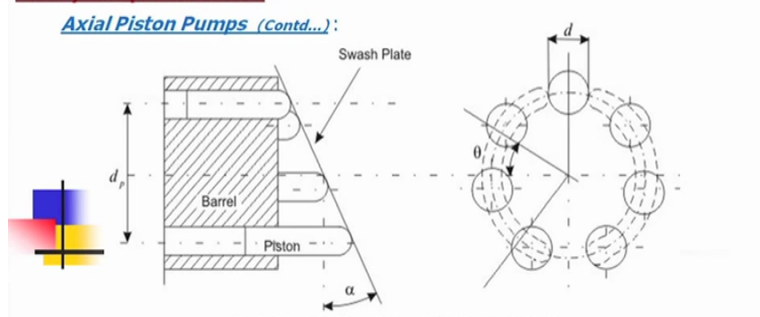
Axial Piston Pump / Motor (Schematic View).
